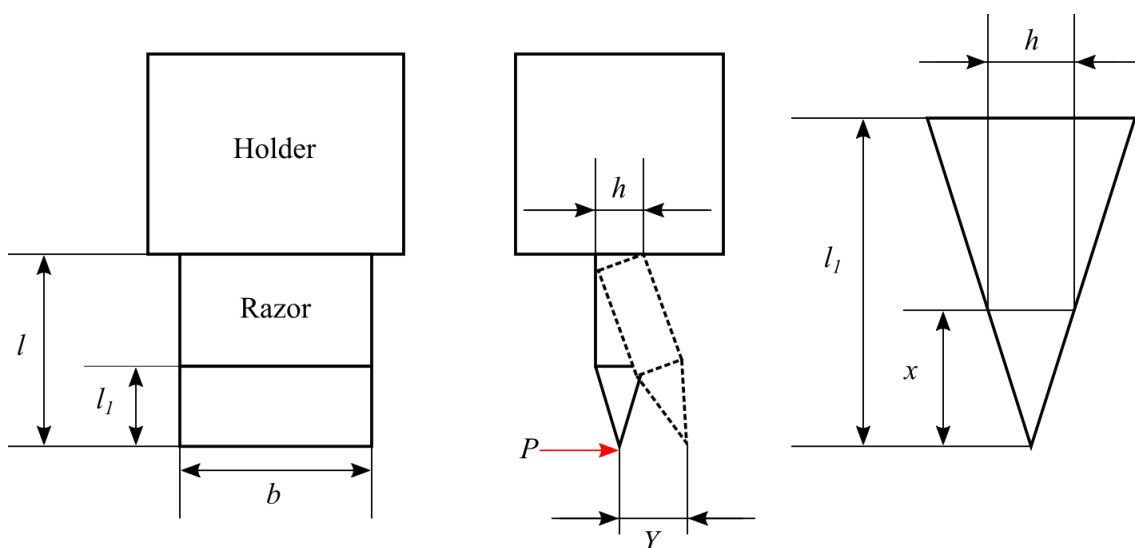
Schematic diagram of processing blade (a) Front view (b) Side view (c) Enlarged view of the blade edge of(b).
